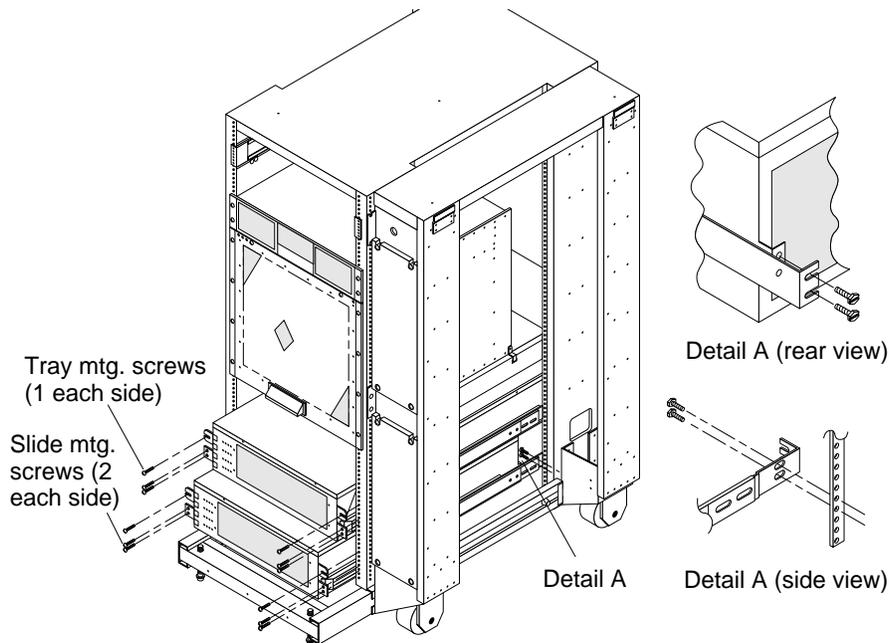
Securing the Slide Rails and Tray Assembly in the Cabinet
